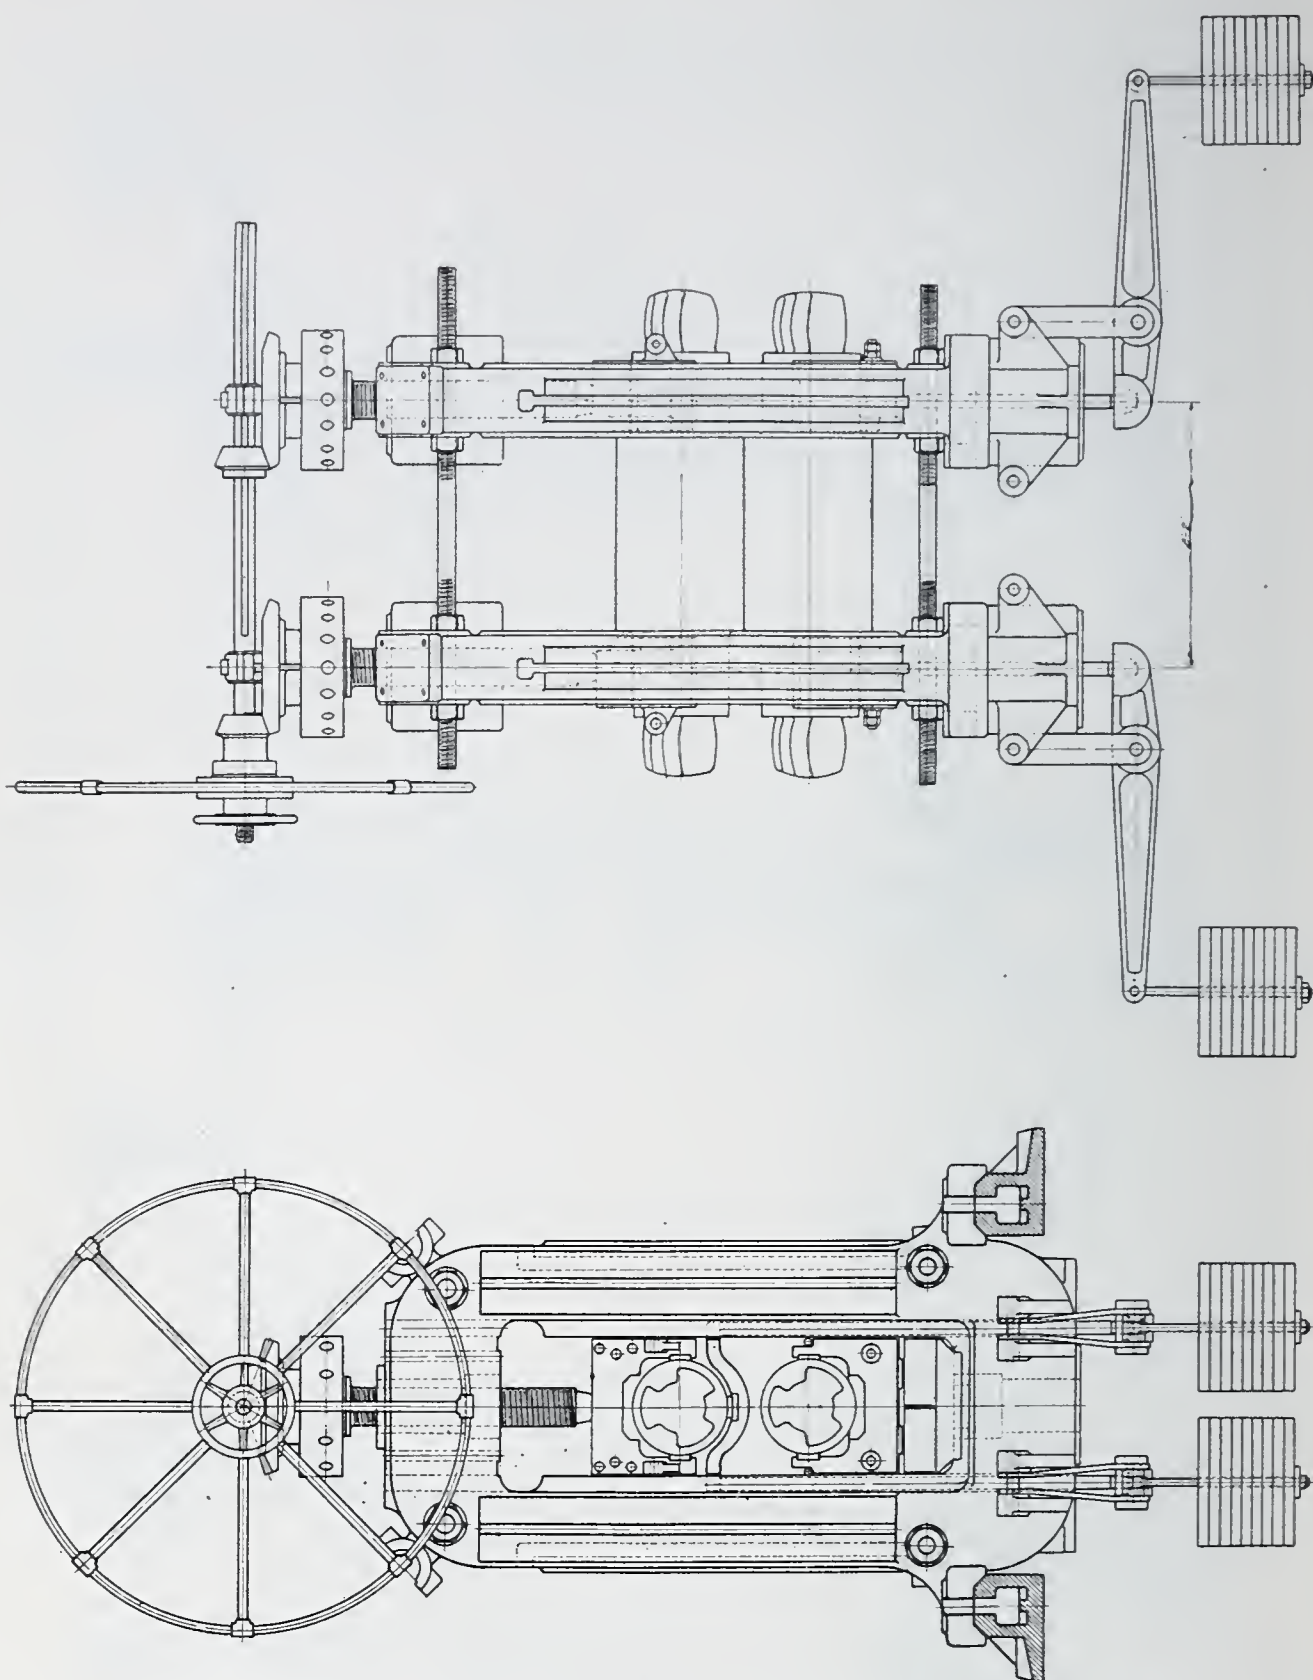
Arrangement of 24-Inch, Three-High Plate Mill.
